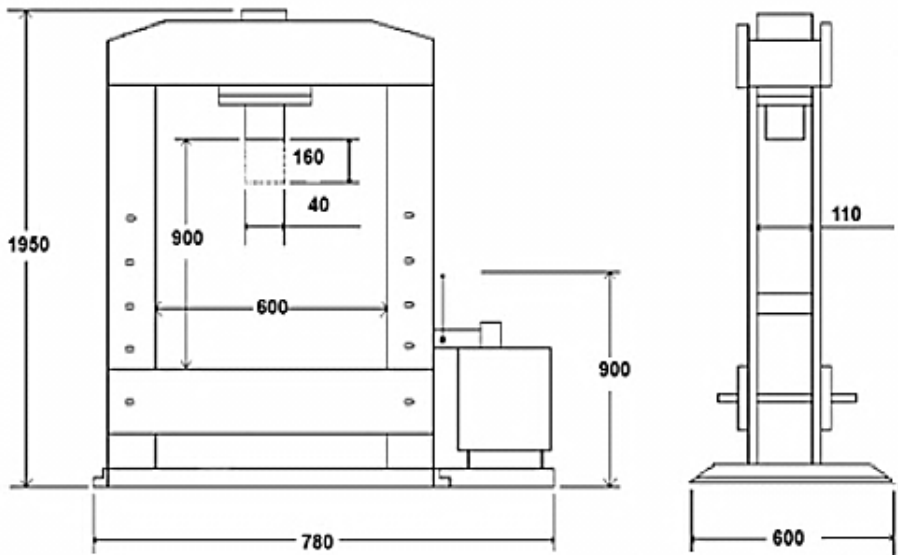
Schematic diagram of pressing apparatus dimensions in mm, (EL Bessoumy, 2005).
